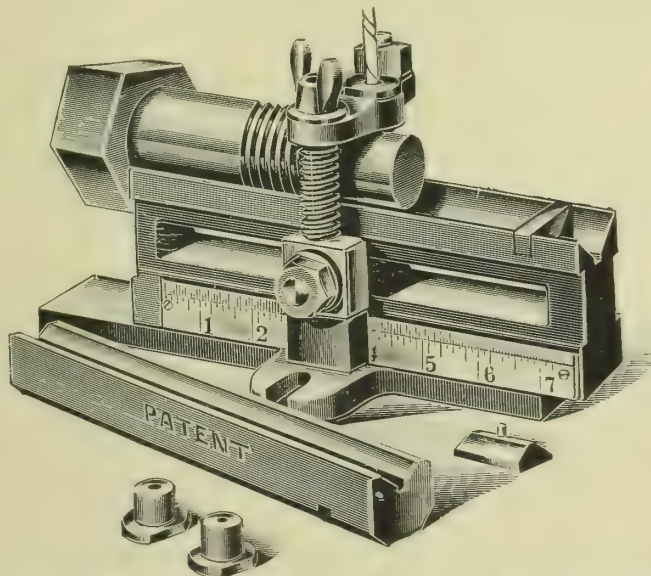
"SELSON" QUICK-CHANGE UNIVERSAL DRILL JIG, WITH TOP V BLOCK REMOVED FOR DRILLING LARGE BOLTS. MESSRS. THE SELSON ENGINEERING COMPANY, LTD., LONDON.
